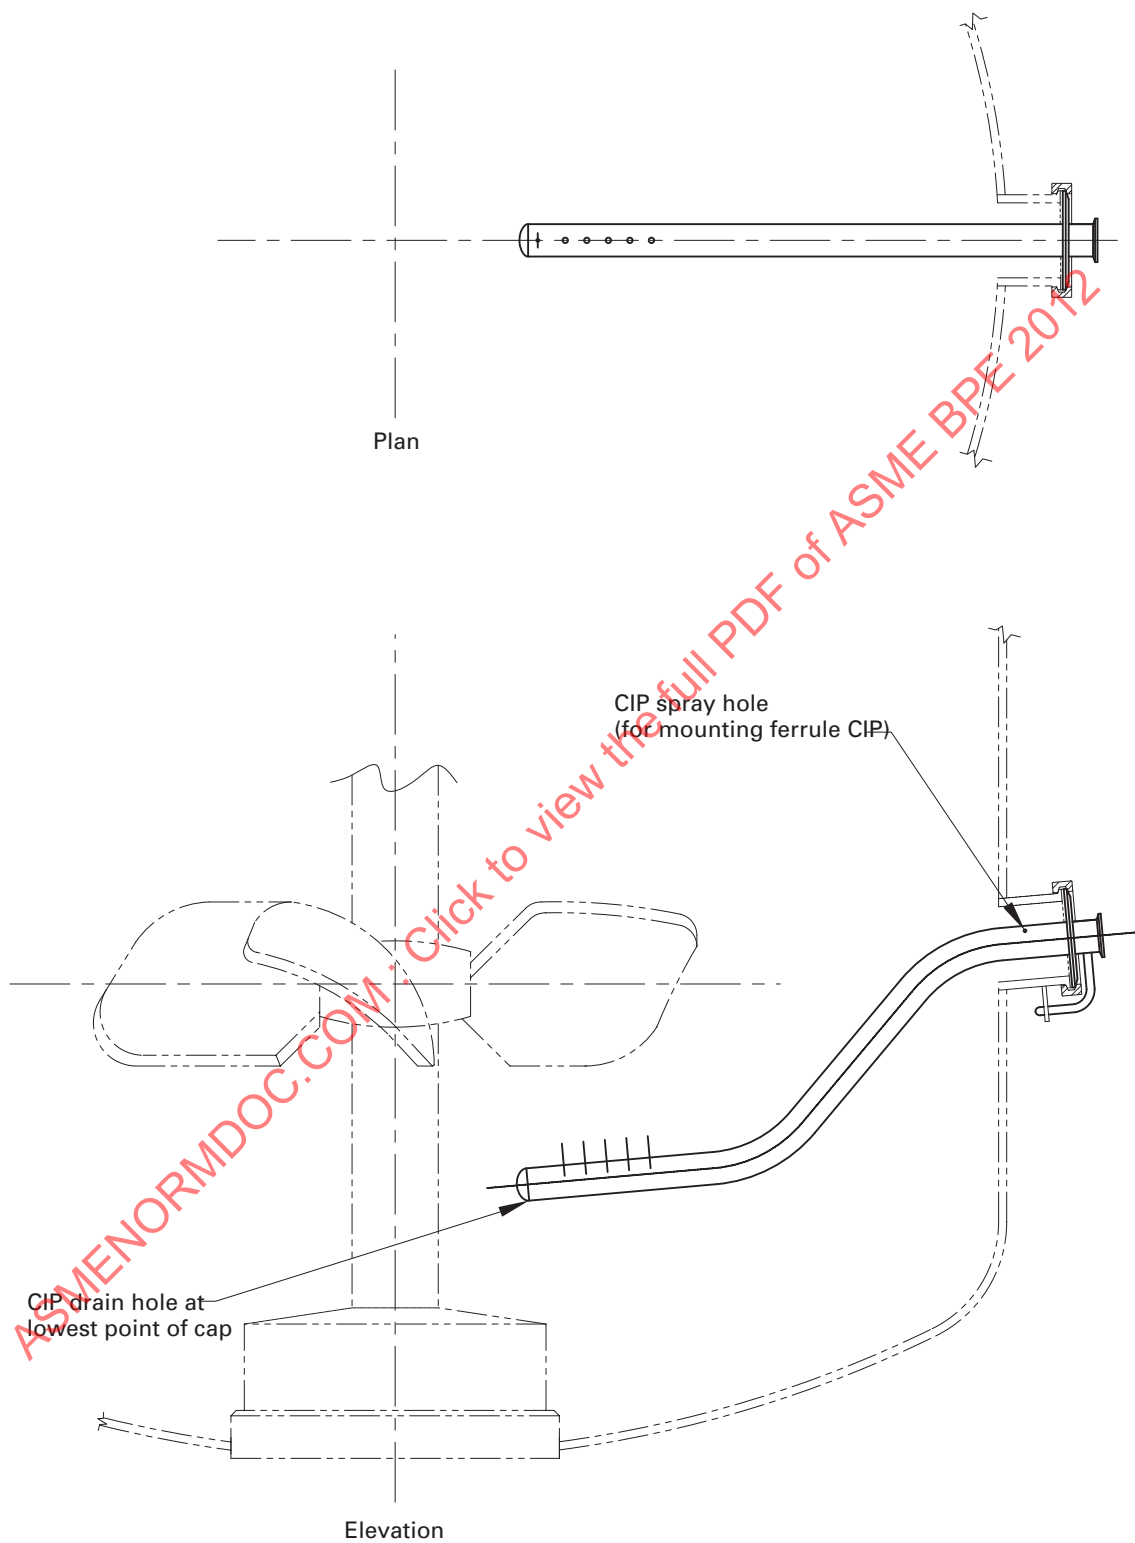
Gas Sparging Assembly — Sintered
